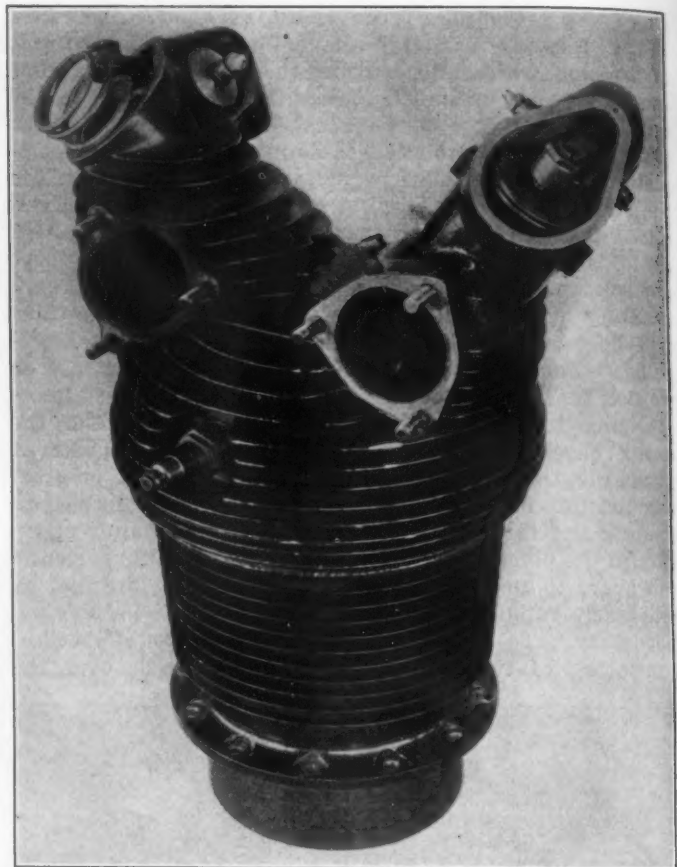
CYLINDER WITH ENCLOSED VALVE-MECHANISM
